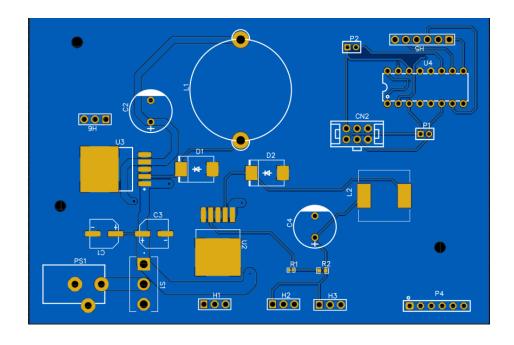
Opto-Smart Pet Feeder Overall PCB Layout
